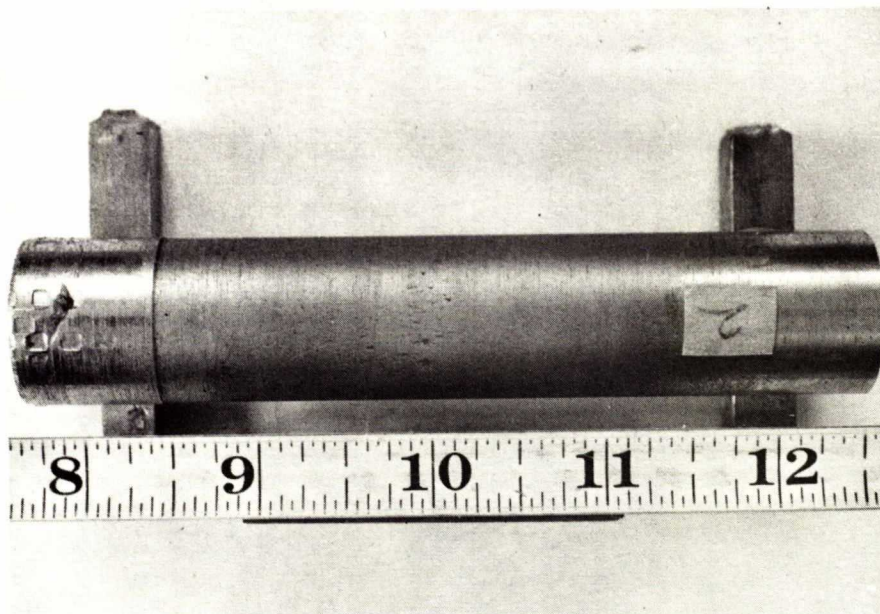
Core piece containing defect No. 27, after magnetic particle testing; the core is turned 180° from the view shown in Figure 33.
